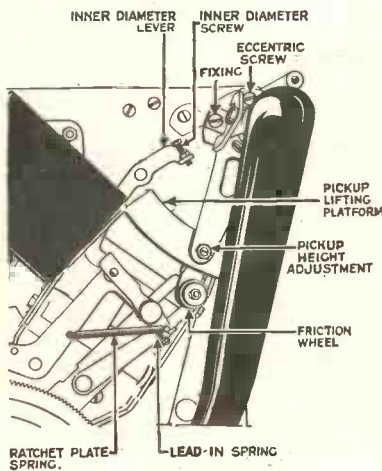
A CLOSE-UP VIEW OF THE TONE ARM ADJUSTMENTS.
